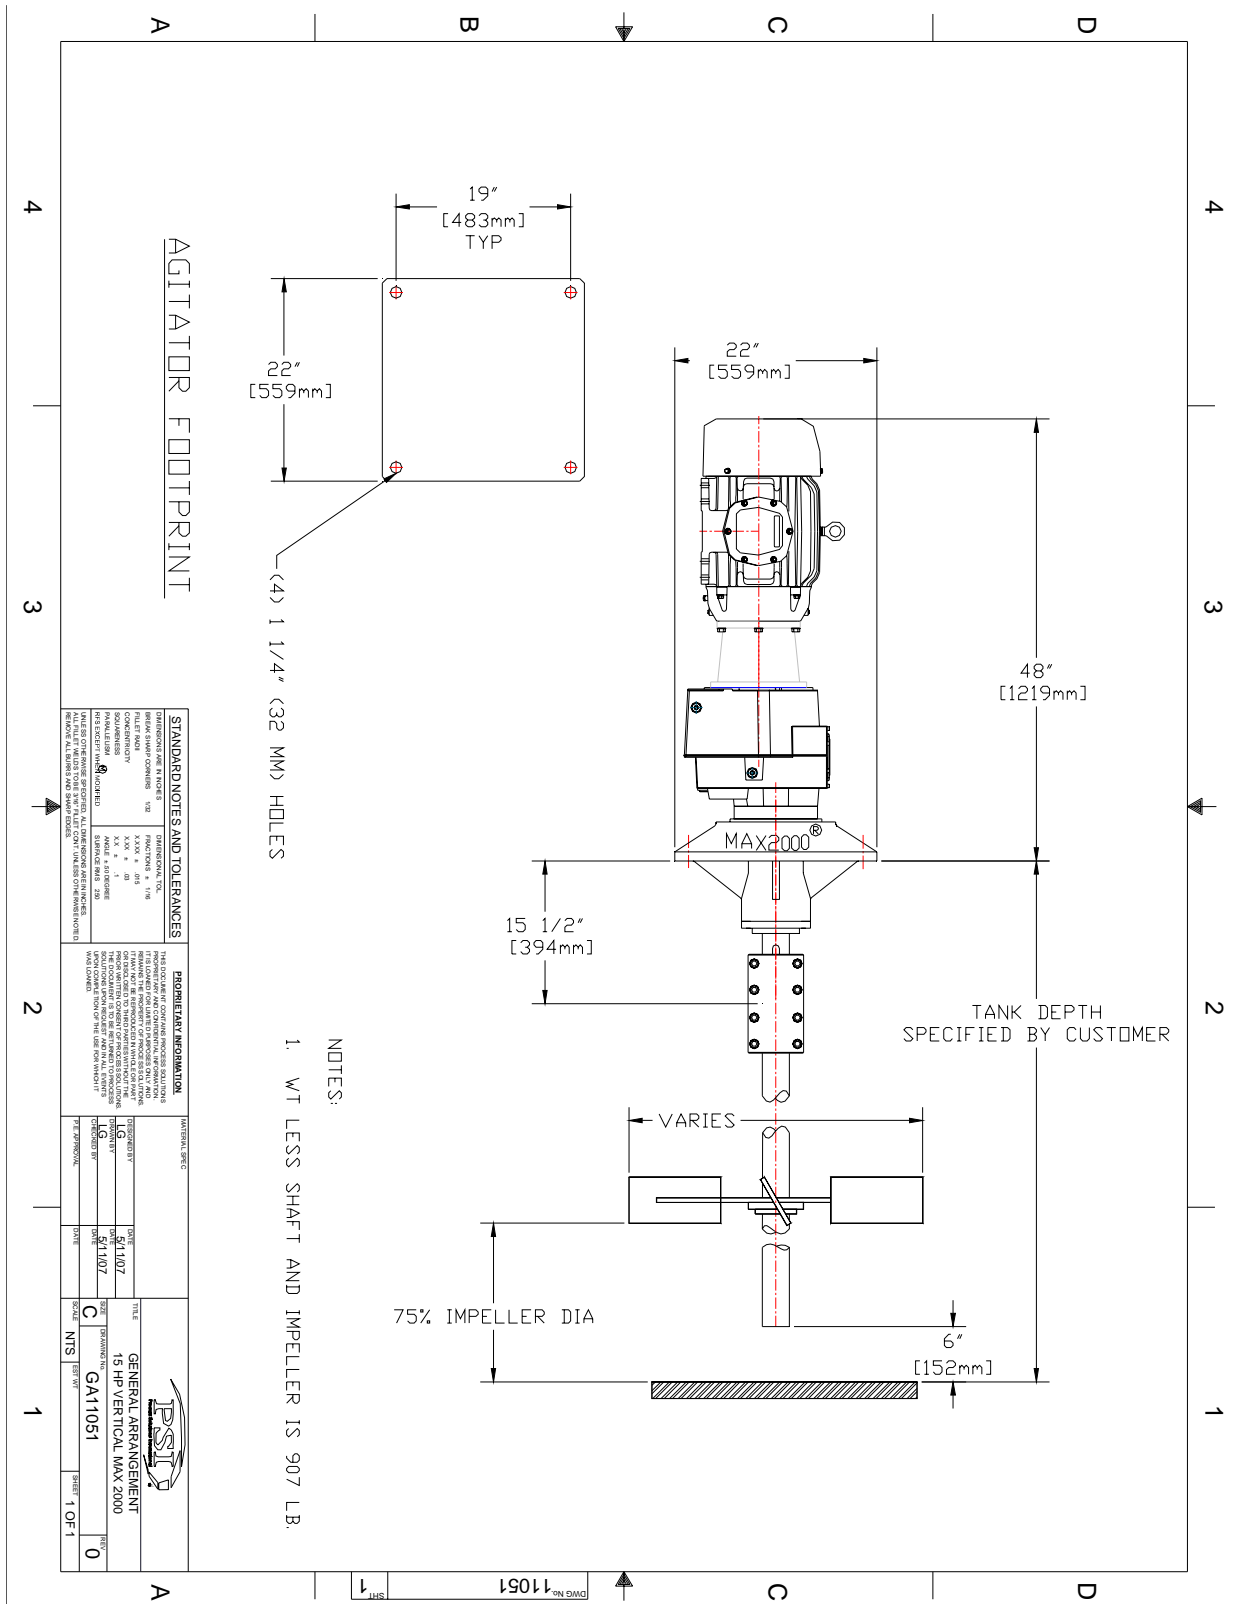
DIMENSIONAL DRAWING MAX-MA15V
